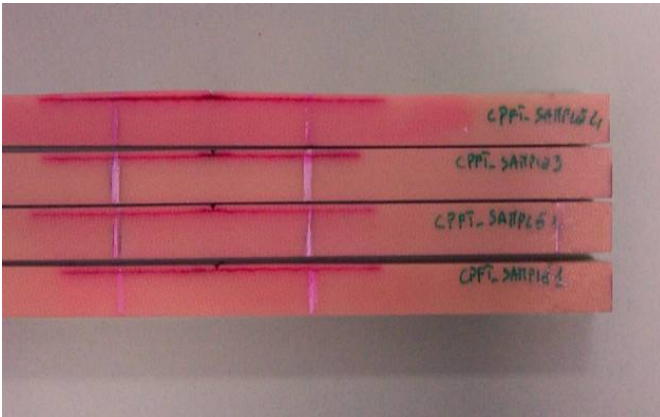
Side view of the sample crack at the end of fatigue test in 4-point bending mode. CIRA photo
